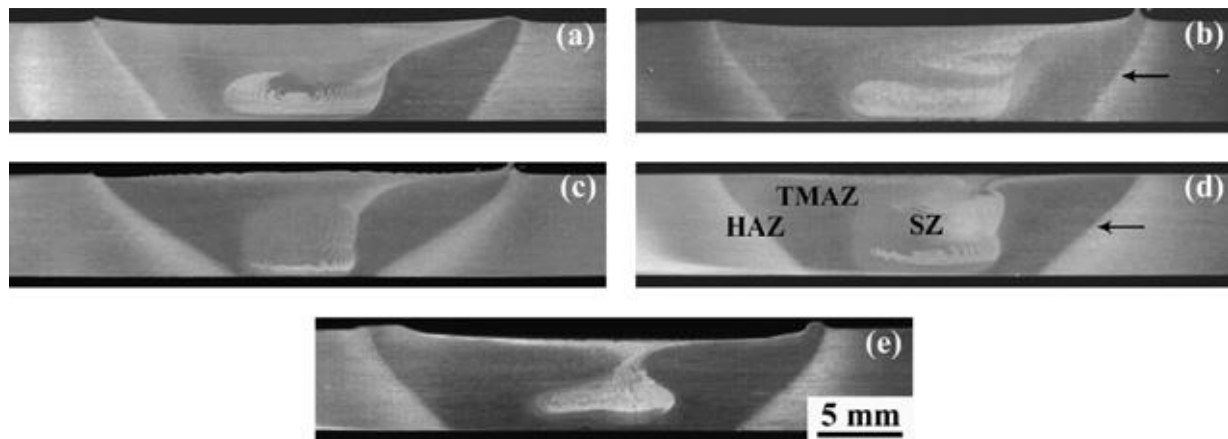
Cross-sectional macrostructures of FSW 6061Al-T651, (a) 400 rpm, 100 mm/min, (b) 600 rpm, 100 mm/min, (c) 800 rpm, 400 mm/min, (d) 1200 rpm, 400 mm/min, and (e) 1600 rpm, 400 mm/min. The advancing side of the weld is on the right in all the macrographs. ([Ren et al., 2007](#))
